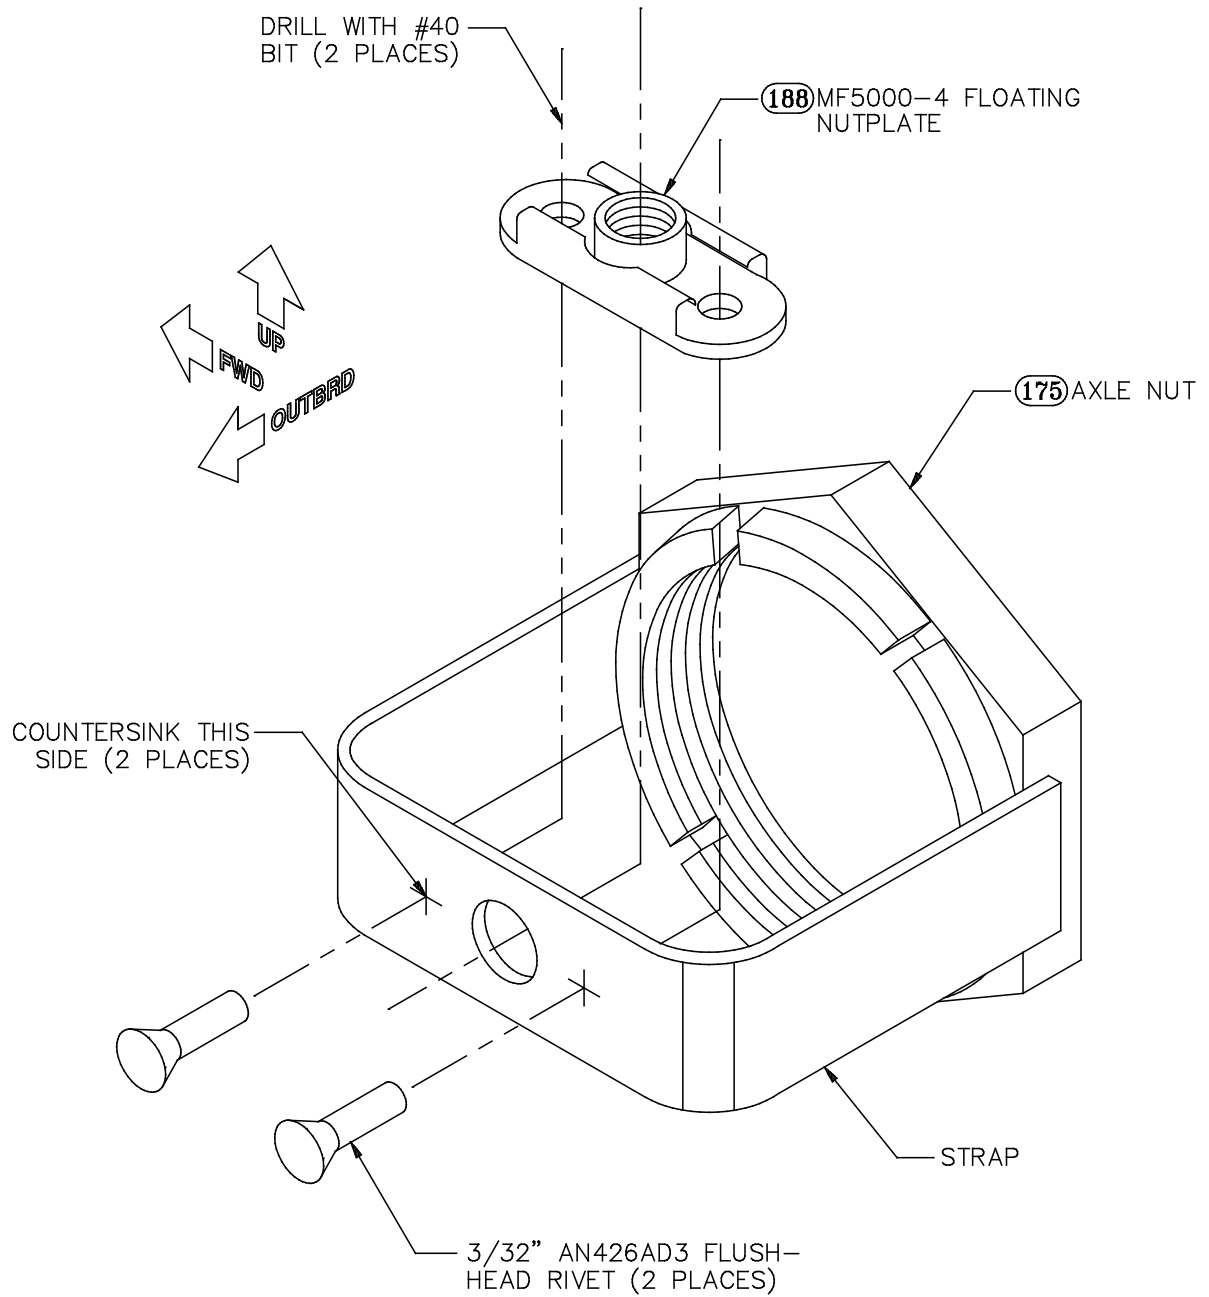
Installing the Outboard Wheel Pant Nutplate on the Axle Nut
